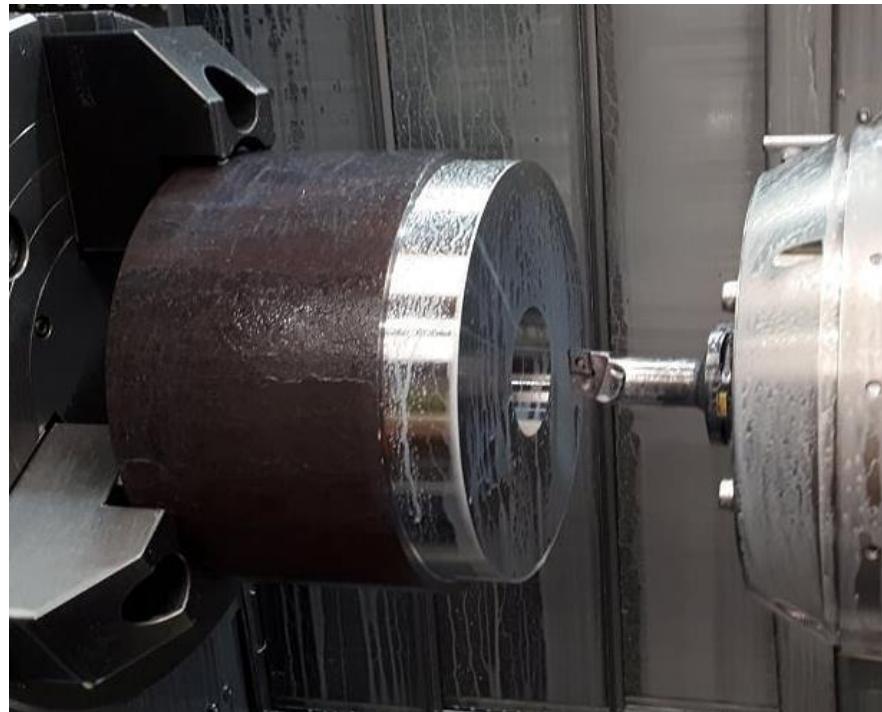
Workpiece prepared for trochoidal milling experimentations, turned and pre-drilled
